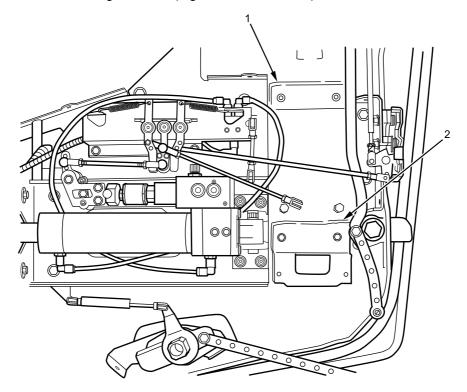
Cabin Door Interior Handle Assembly Removal from Inner Door.
